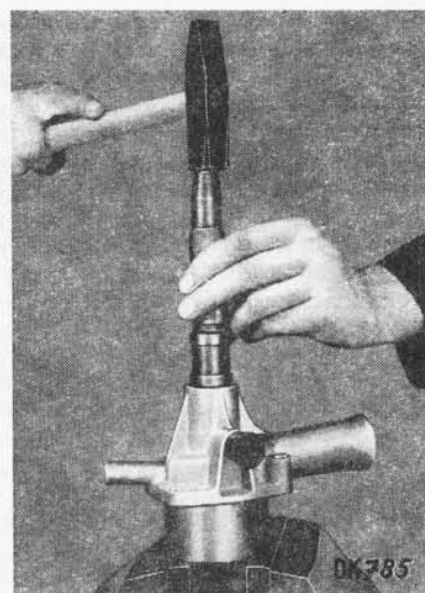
/4 - Driving Home Bearings Using MP 1-123 Drift
